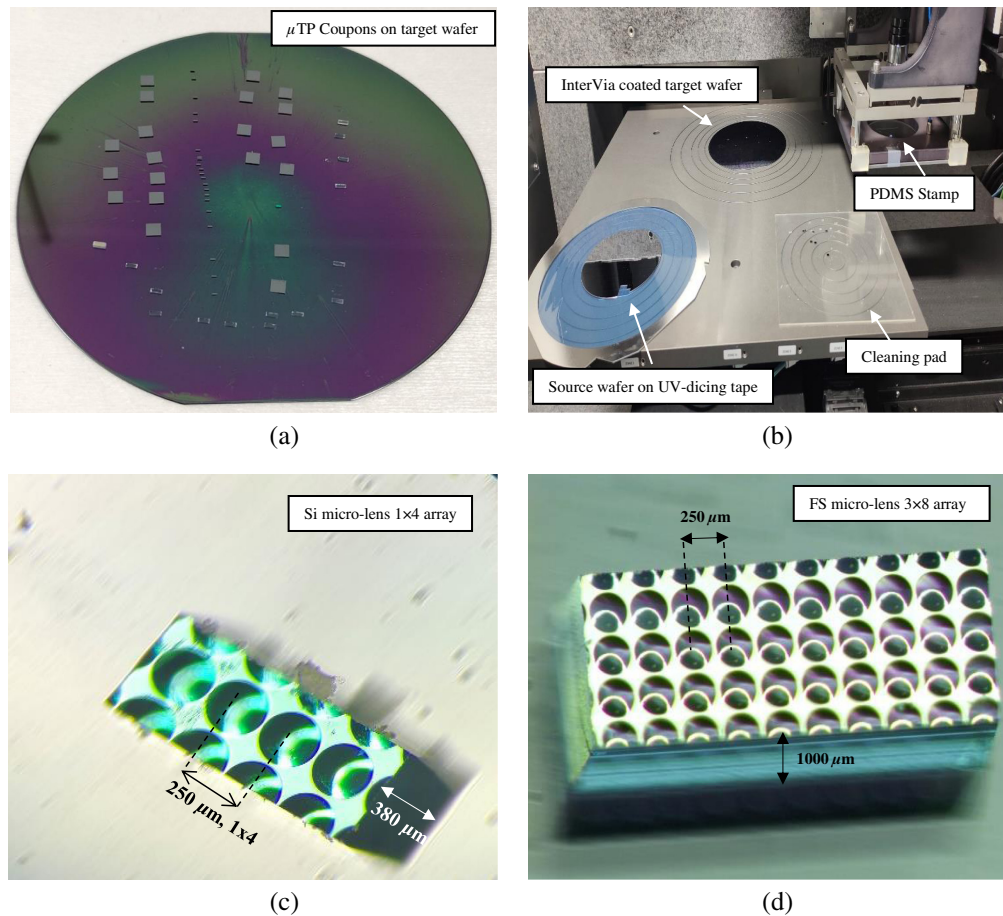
(a) Image of Si and FS coupons printed on $2\ \mu\text{m}$ thick InterVia coated target wafer, (b) X-celerprint machine set-up and (c), (d) higher magnified images showing printed Si and FS micro-lenses.
